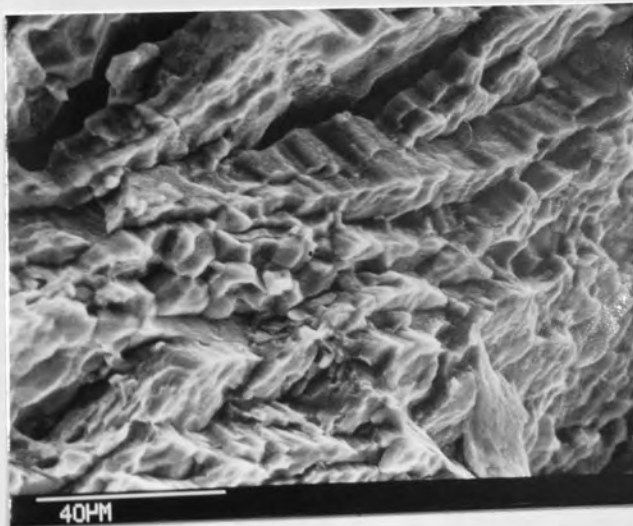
Ductile failure on fast fracture surfaces of 8090-T6 fatigue specimens.
